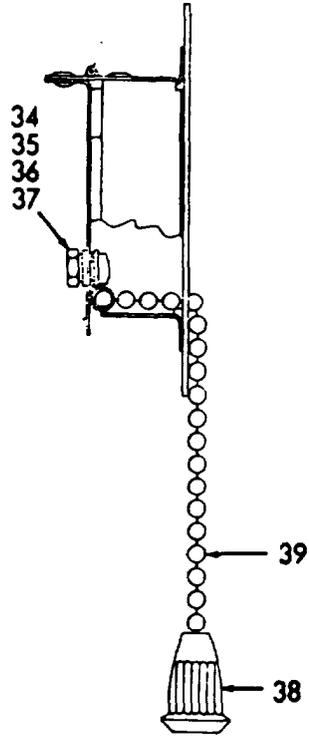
Cabinet Assembly (Sheet 1 of 2).
